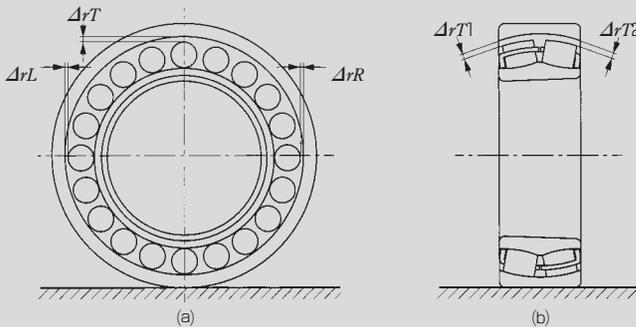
Clearance Measurement Points (Bearing Outside Diameter: Larger Than 200 mm)
